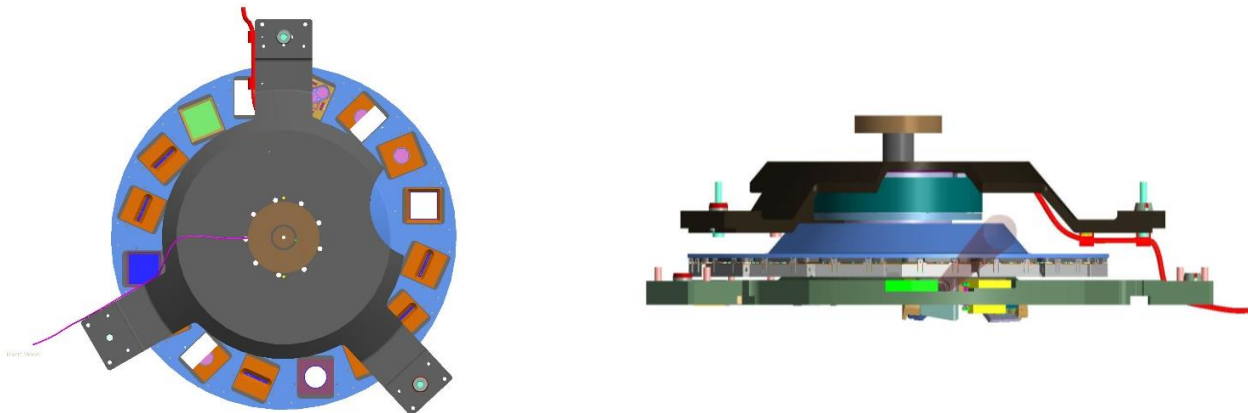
The top view (left) and side view (right) of the FP2 wheel structure.
